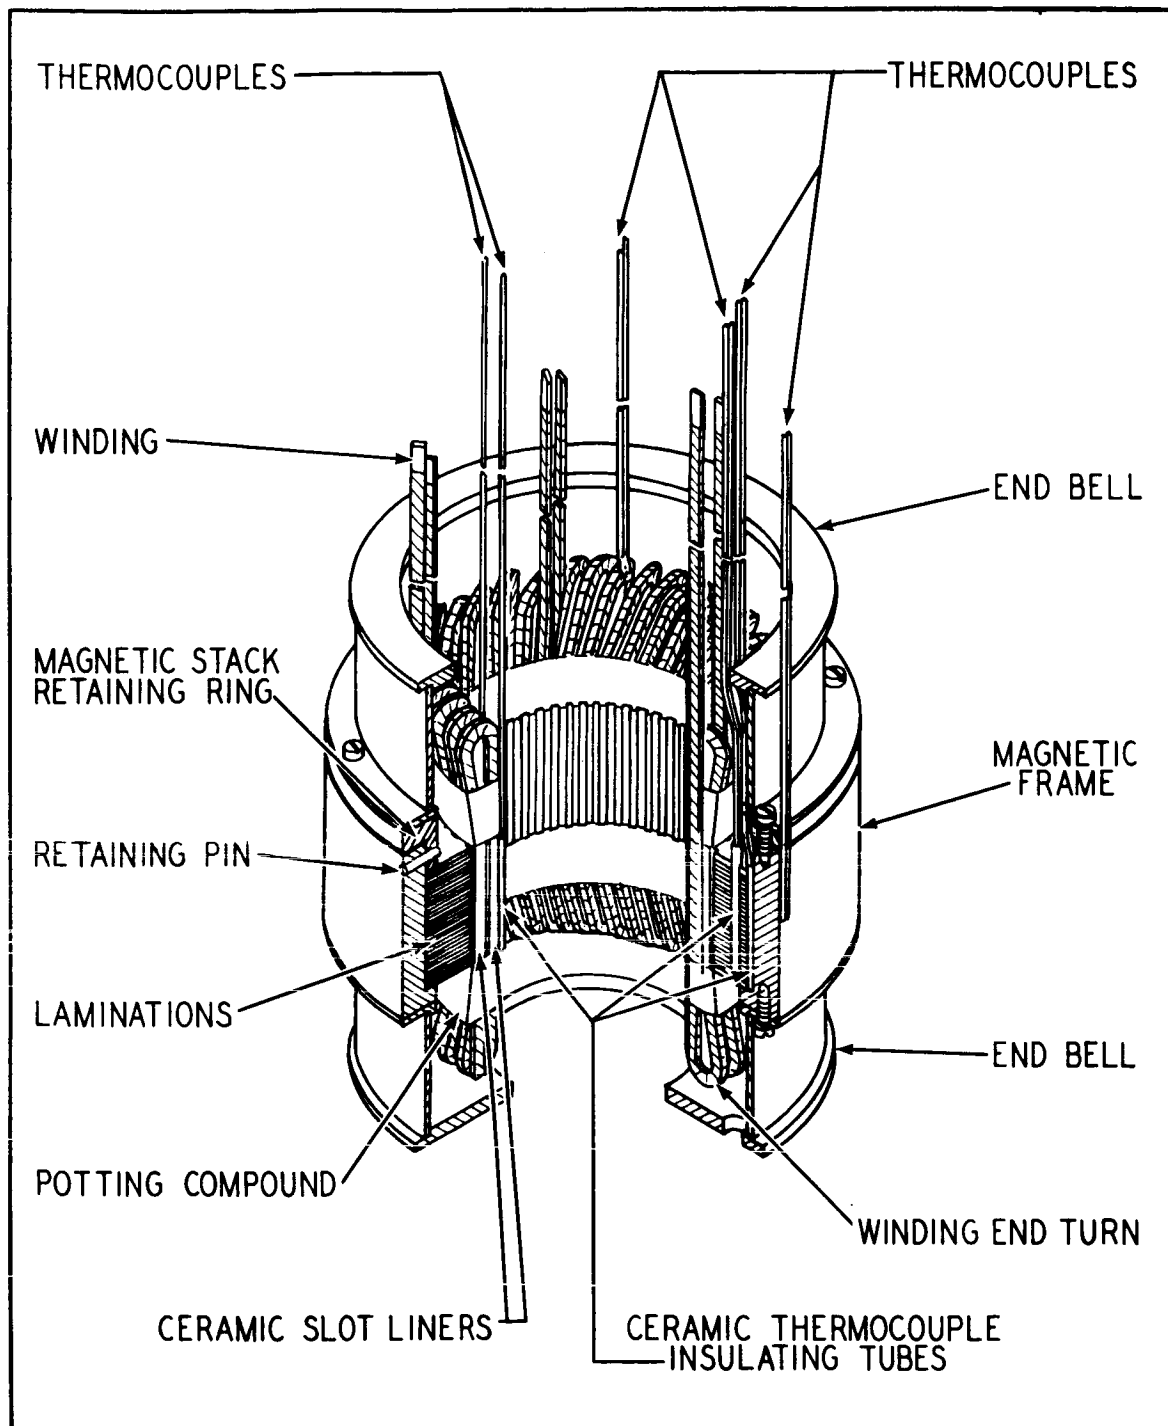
Cutaway View of Stator Without a Bore Seal
